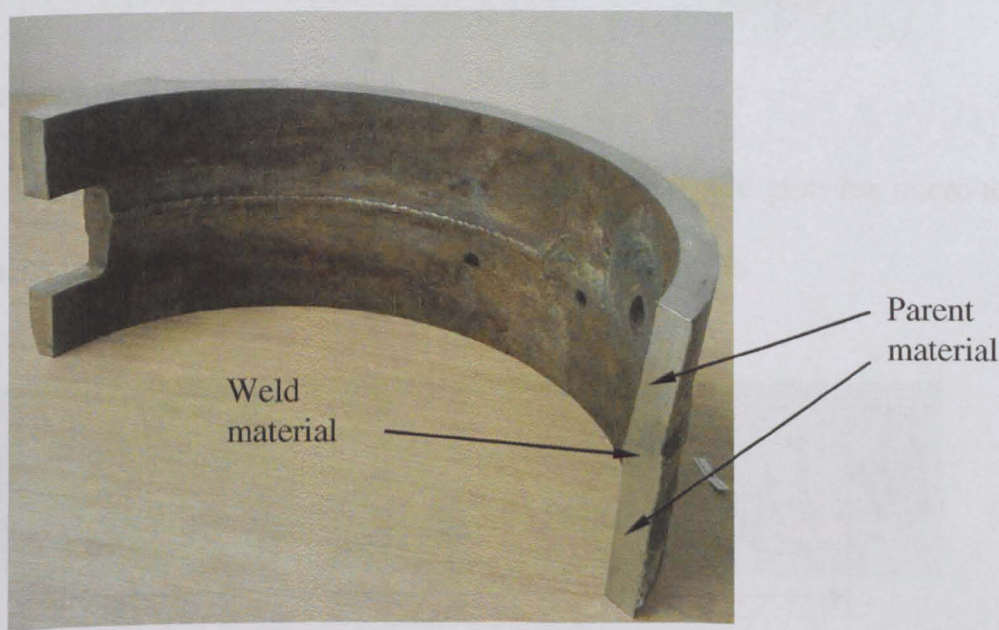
A photograph of the semi girth welded pipe.
